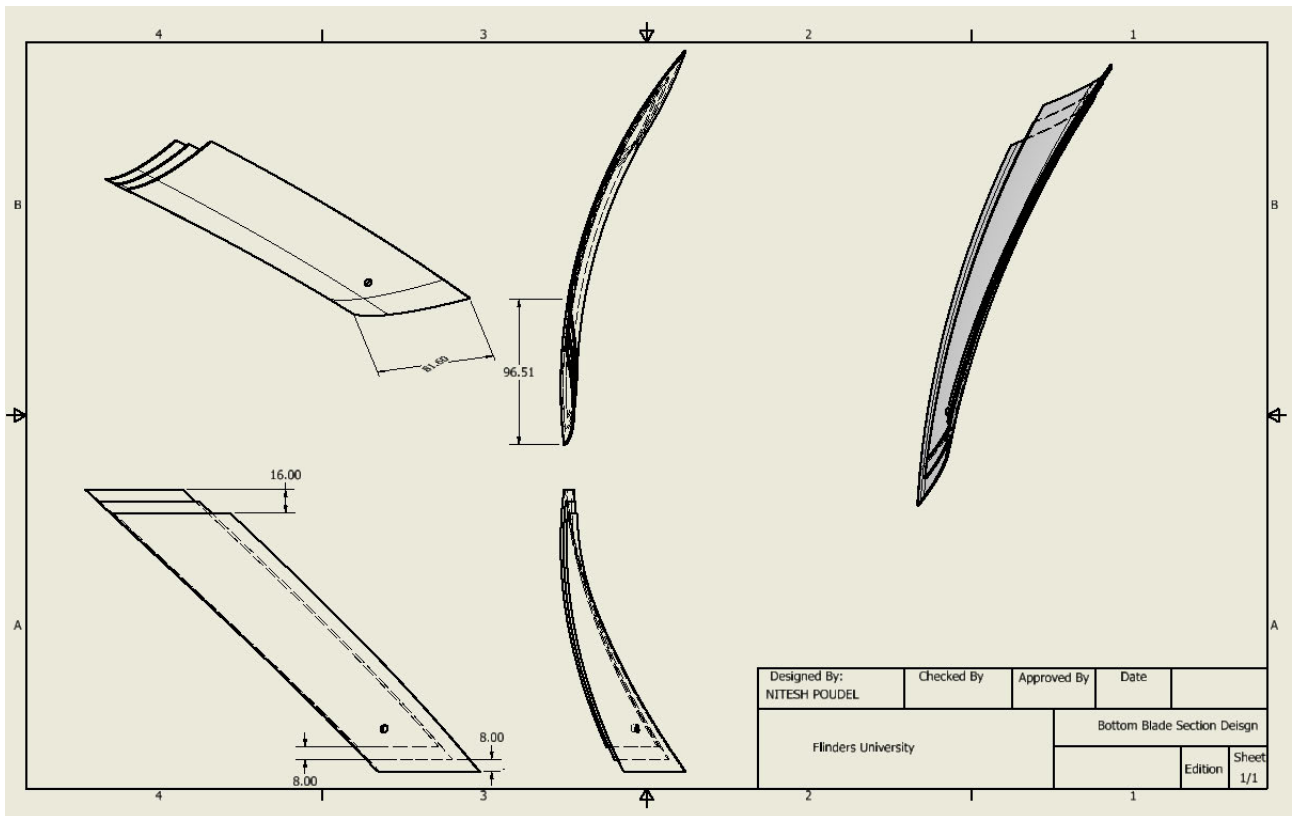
Engineering design for Bottom Blade with manufacturing approach
